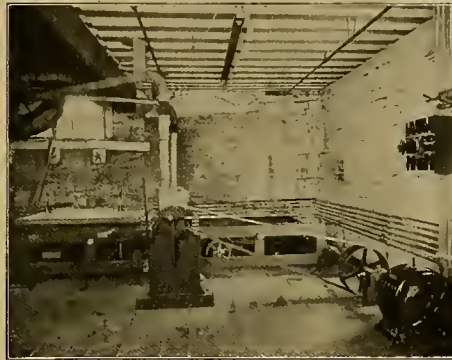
INDUCTION MOTOR DRIVING BACK-SHAPING MACHINE
